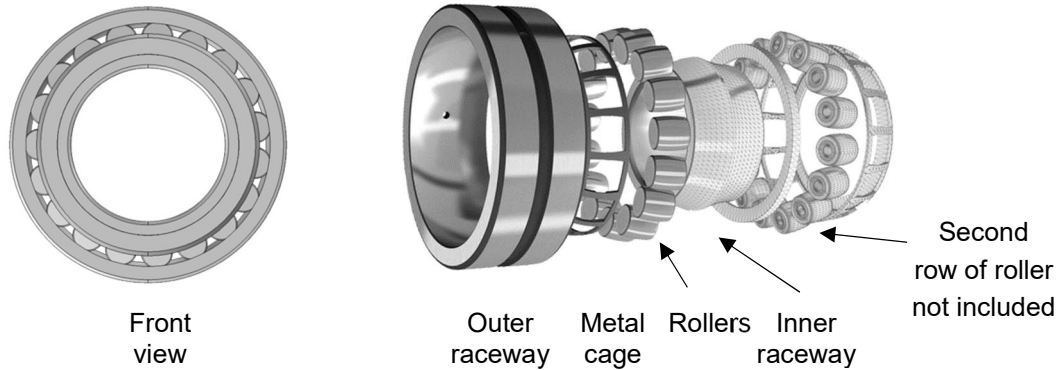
Schematic view and exploded view of 22220 bearing showing its different elements. CAD drawing is obtained from SKF knowledge base.
